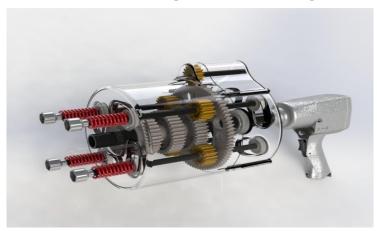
Final Assembly and Contraction Motion of the Mechanism.
